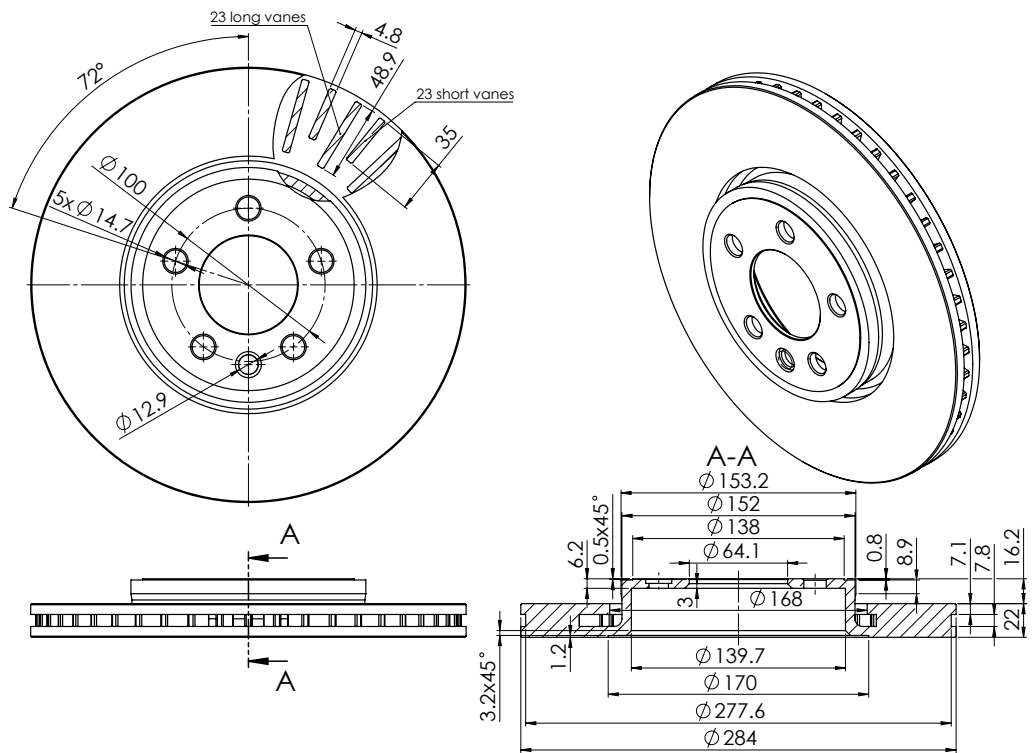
Drawing of the Rover 75 disc showing the nominal dimensions.
